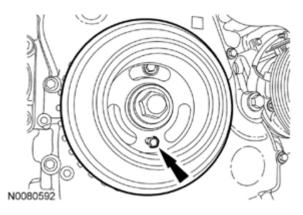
View Of Crankshaft Pulley And 6mm x 18 mm Bolt Courtesy of FORD MOTOR CO.
